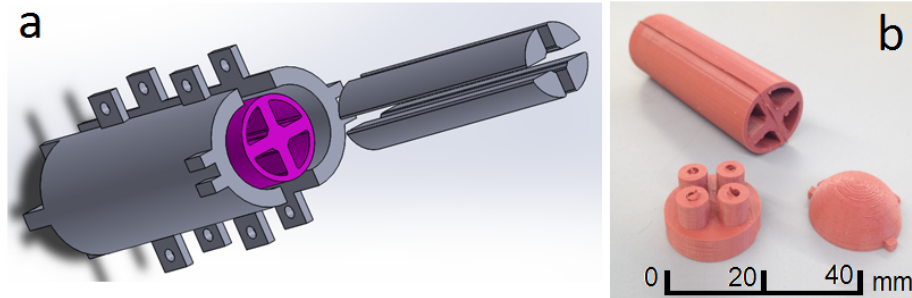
Actuator design. (a) Exploded view of actuator mold design (actuator body highlighted in purple). (b) Image of completed actuator body and end caps before final assembly.
